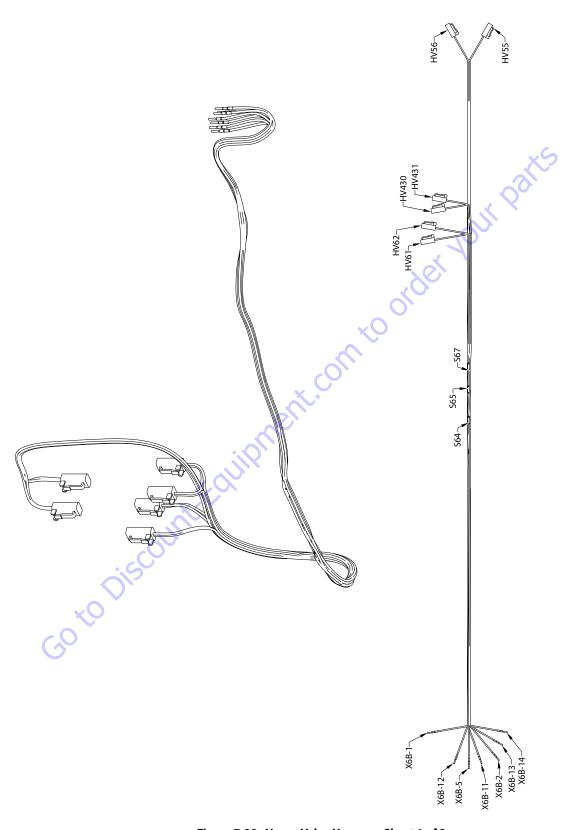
Upper Valve Harness - Sheet 1 of 2
